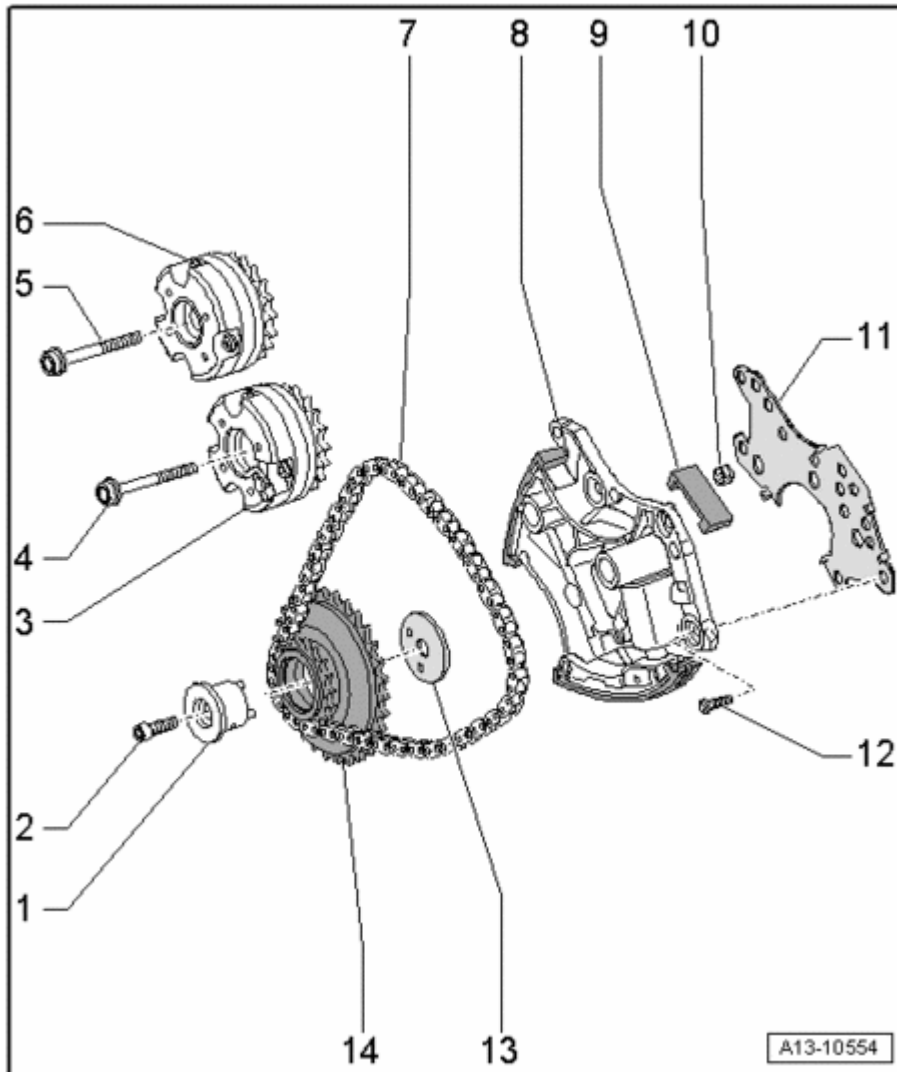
Camshaft Timing Chain, Component Overview - Right Camshaft Timing Chain
